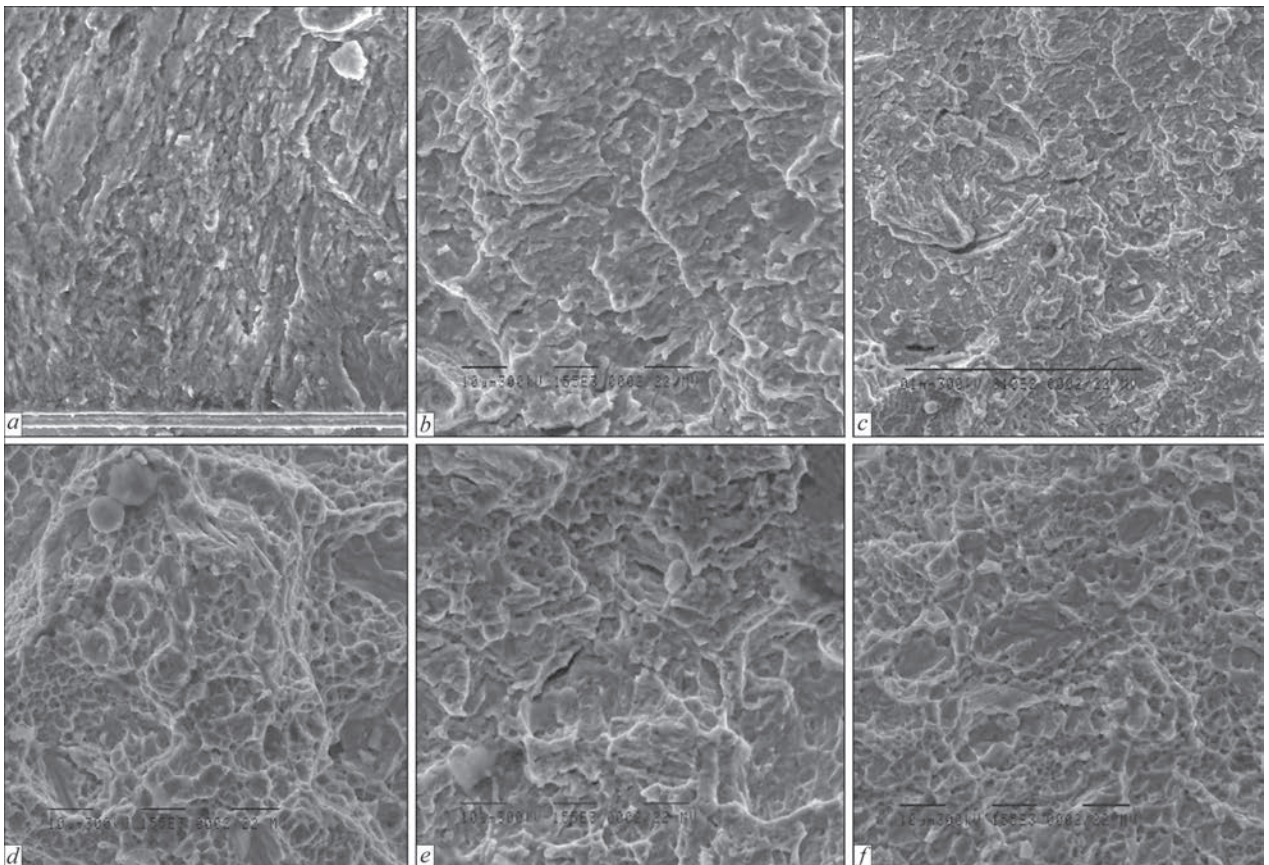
Fracture mode by the zones of armoured steel fracture ($w_{6/5} = 21$ °C/s): *a–c* in fatigue crack zone; *d, e* — in the zone of main crack propagation; *f* — in final fracture zone (*a, b, d–f* — $\times 1550$; *a* — $\times 810$)
